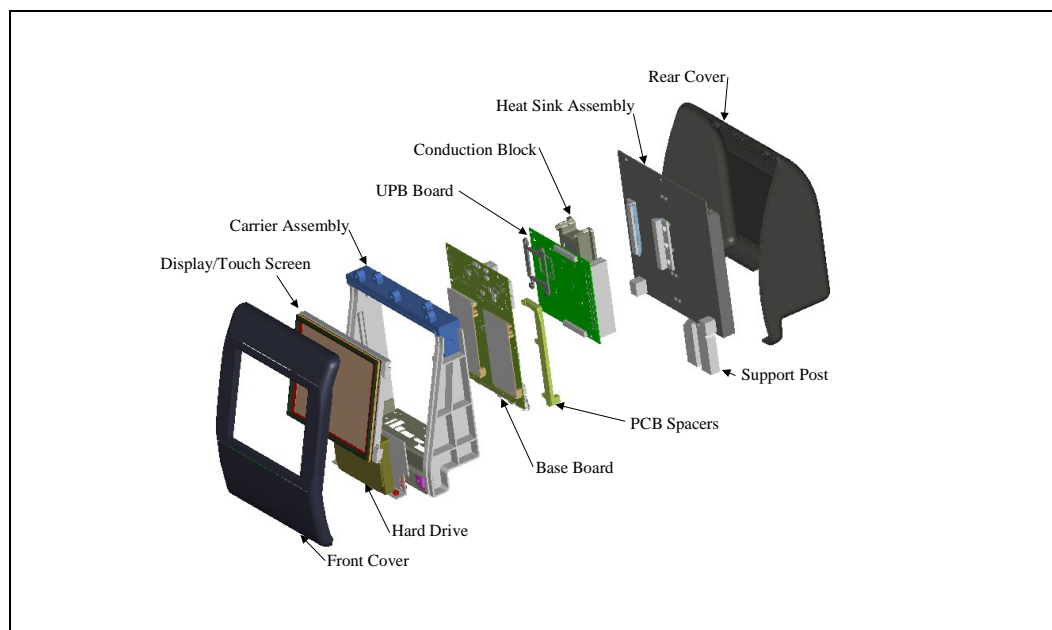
Exploded Assembly View of the Embedded Client Reference Design
